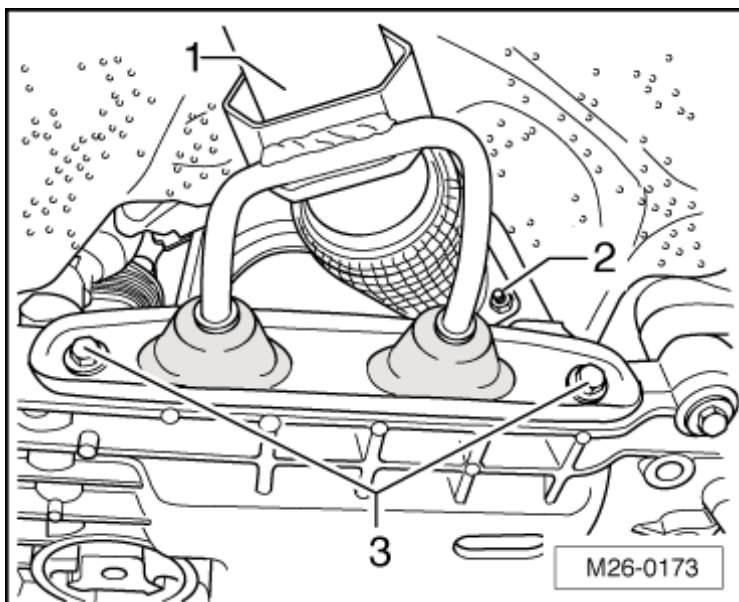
Identifying Nuts, Bolts & Front Exhaust Pipe
